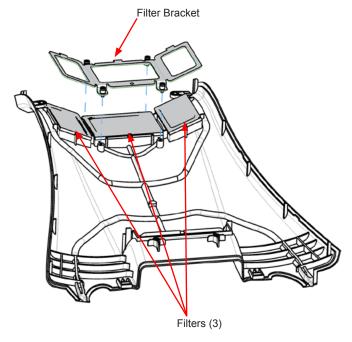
Lower Front Panel - Filter Bracket and Filter Removal
